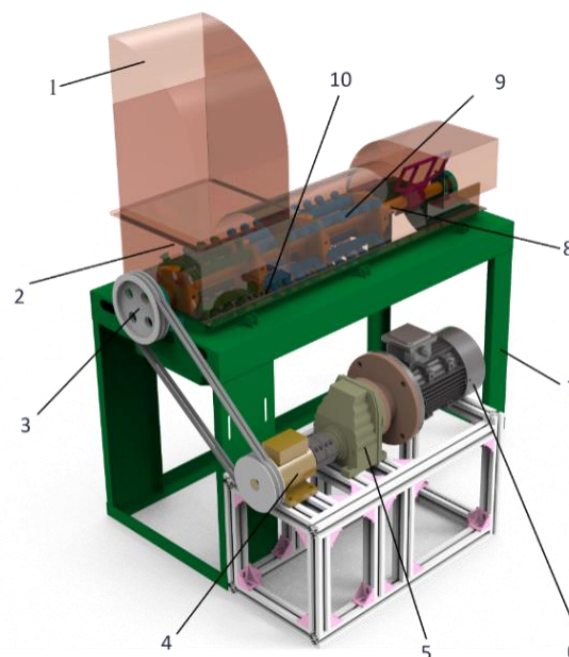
Schematic structure of the single-point hinged flexible corn threshing test bench
